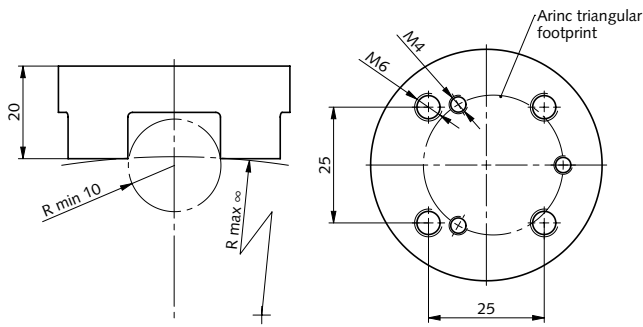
Mounting adapter for tubes, Ø25... ∞
